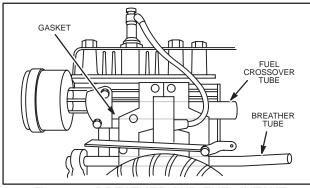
BREATHER AND FUEL INTAKE TUBES
